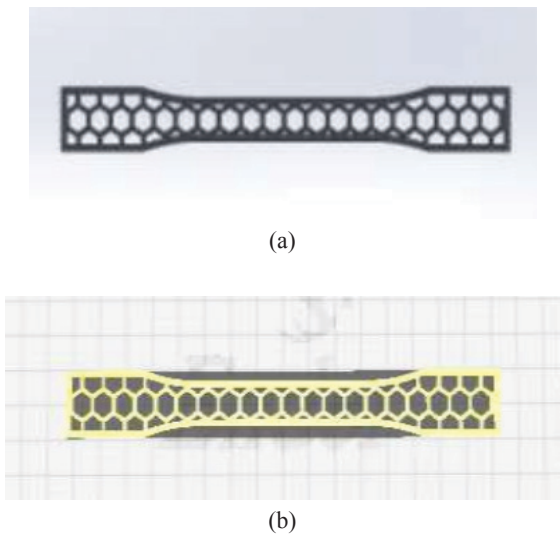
(a) SolidWorks drawing of the specimen (b) STL file as viewed in Ultimaker Cura
